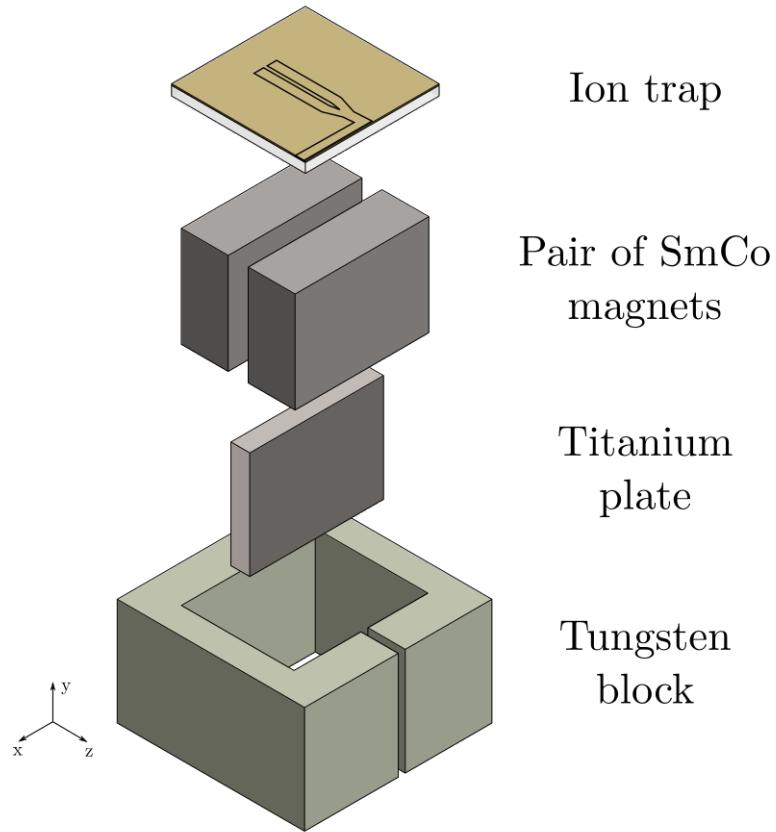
Exploded view of a magnet spacer assembly using a titanium plate to set the magnet-magnet spacing.
